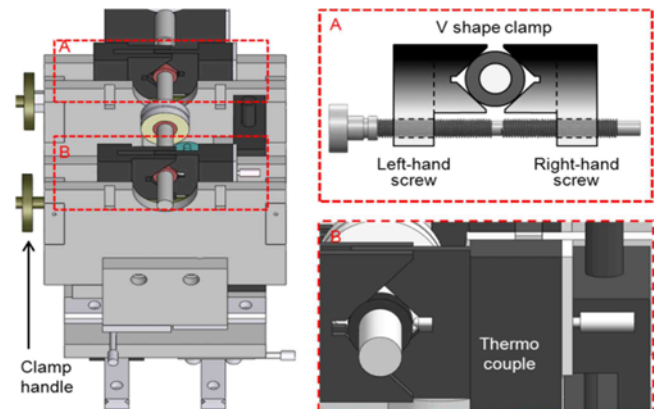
Design of the screw-type V-shaped clamp attachment and the temperature sensor
